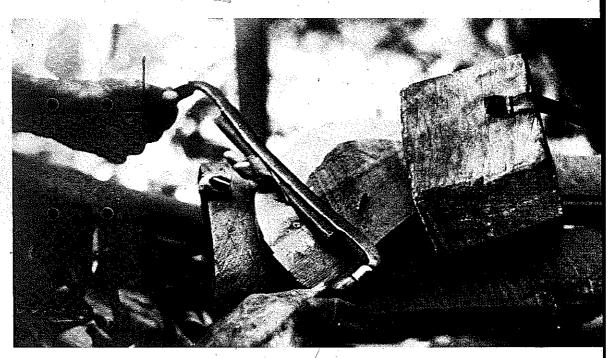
Step 12: Begin to bevel the edges of the half-circles with a drawing knife.
